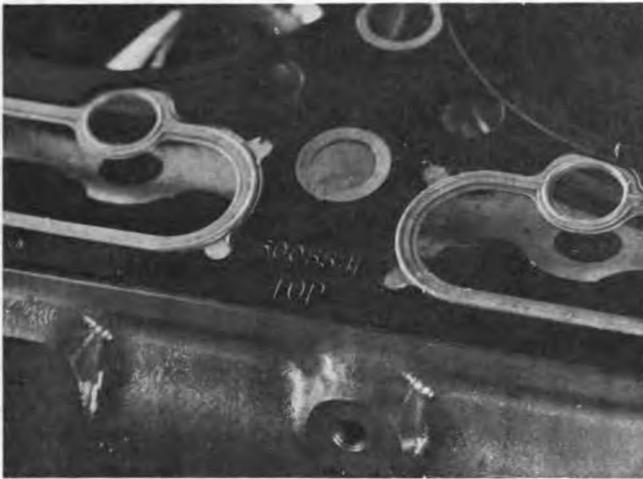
(N114257). Install The Cylinder Head Gasket.
